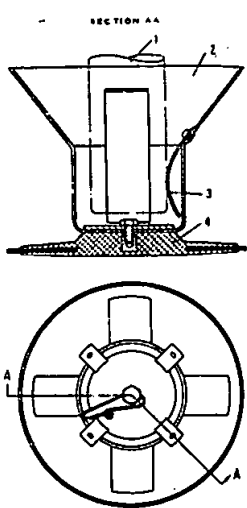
Attachment of Fuel Gauge Transmitters to Fuselage Tanks No. 2, No. 4, and No. 5
